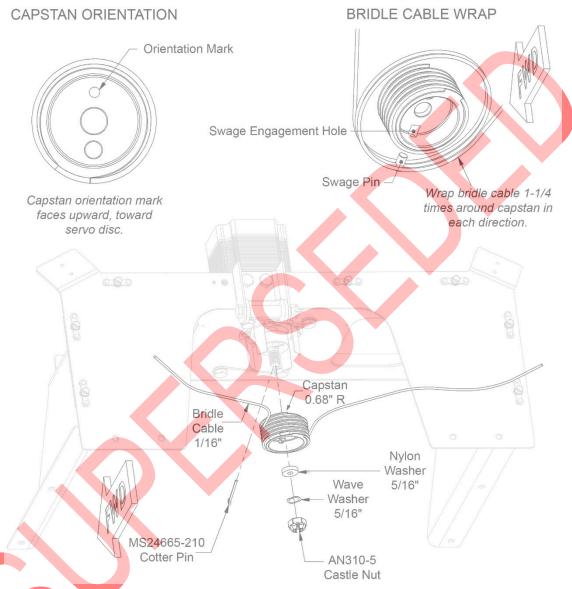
Attaching Capstan with Bridle Cable to Yaw Servo
